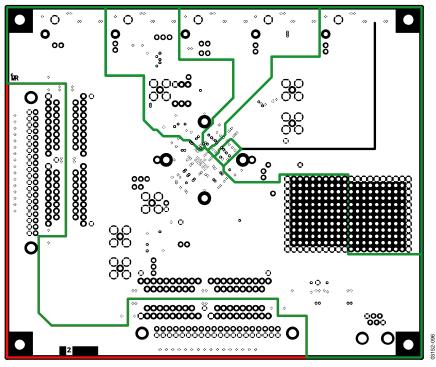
PCB Assembly, Layer 2 Metal (Ground Plane), Rev F Evaluation Board
